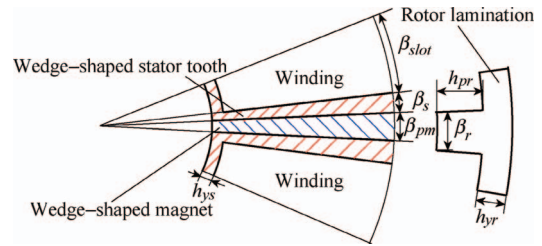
Key dimensions of an OR-SPM-FS machine with wedge-shaped magnets
